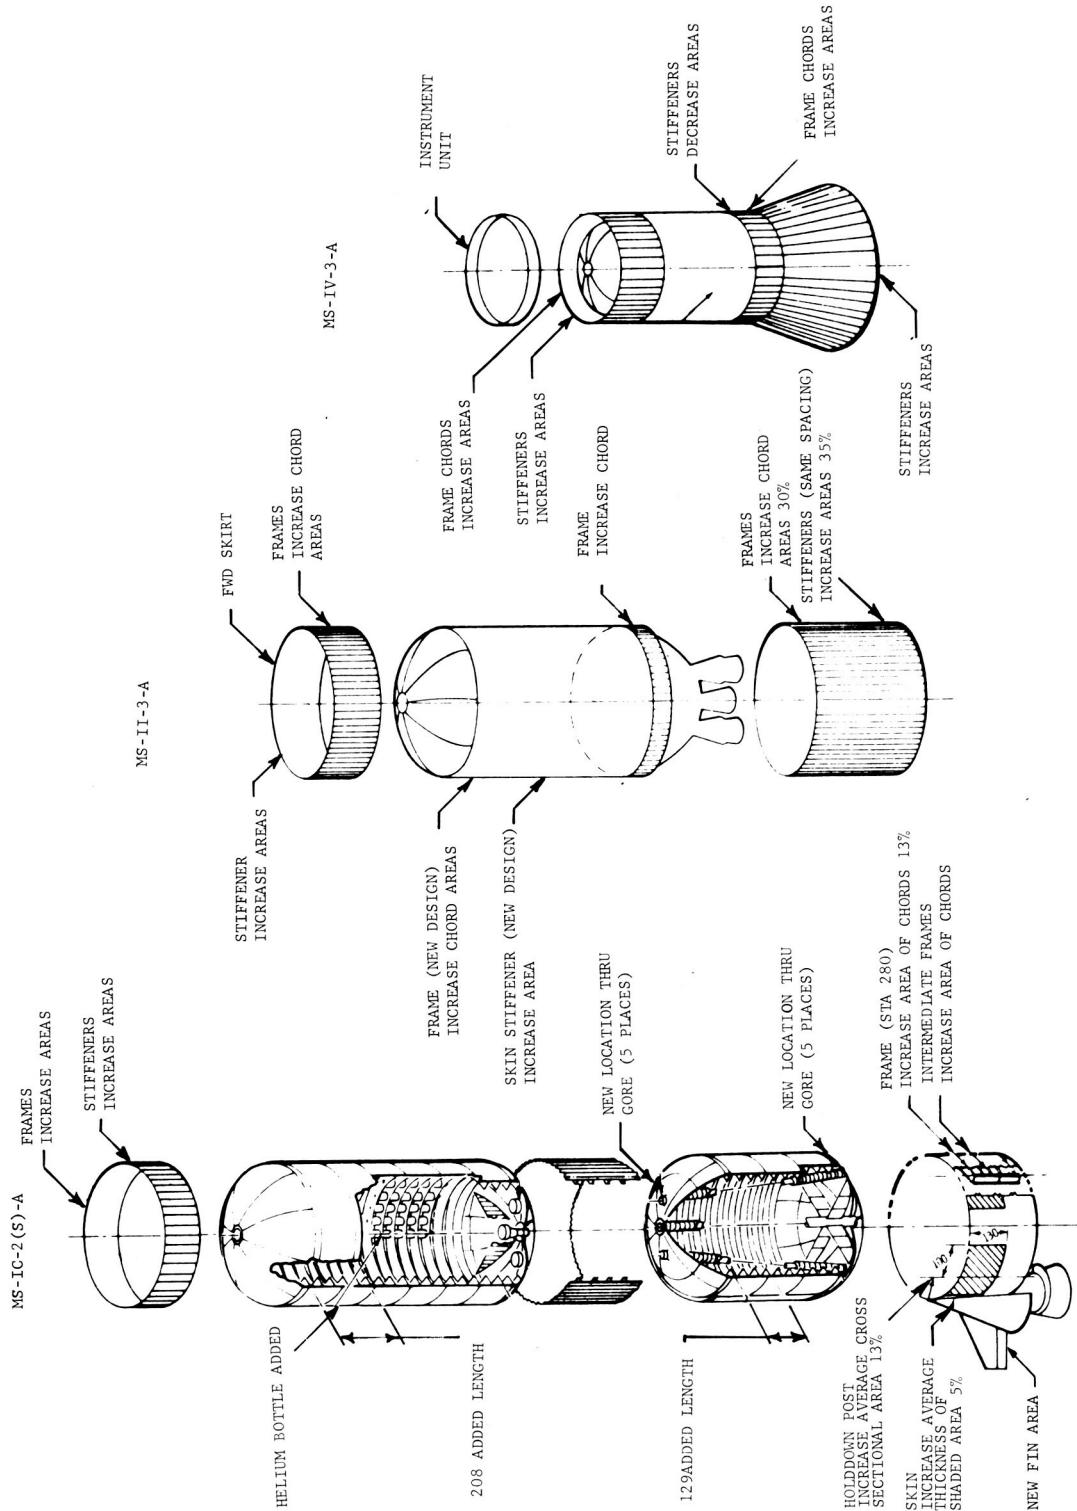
STAGE STRUCTURAL MODIFICATIONS FOR MLV-SATURN V-4 (S)A
